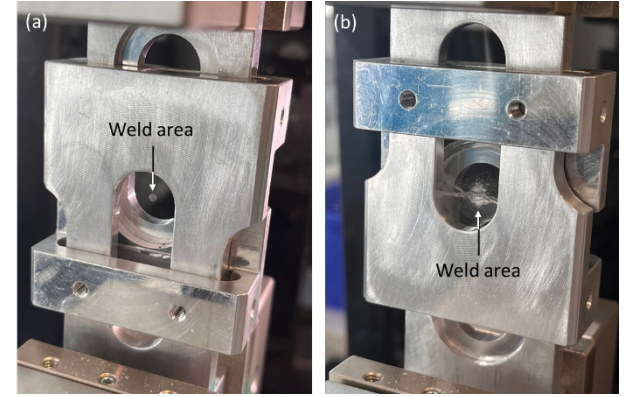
Glass assembly in the sample holder (a) before and (b) after the rupture.
